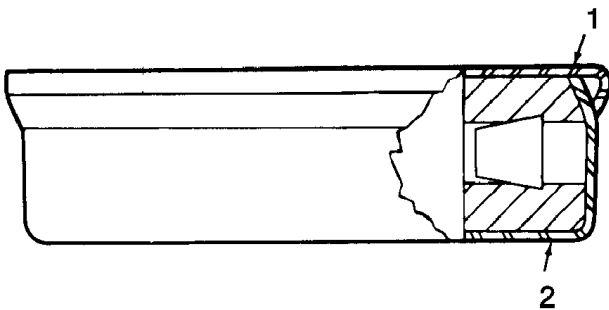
King Pin Bushing Seal Installation (For Upper and Lower)
